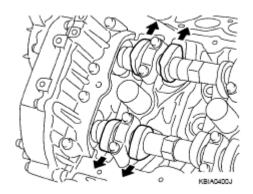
Checking Intake And Exhaust Cam Lobes Of No. 1 Cylinder
